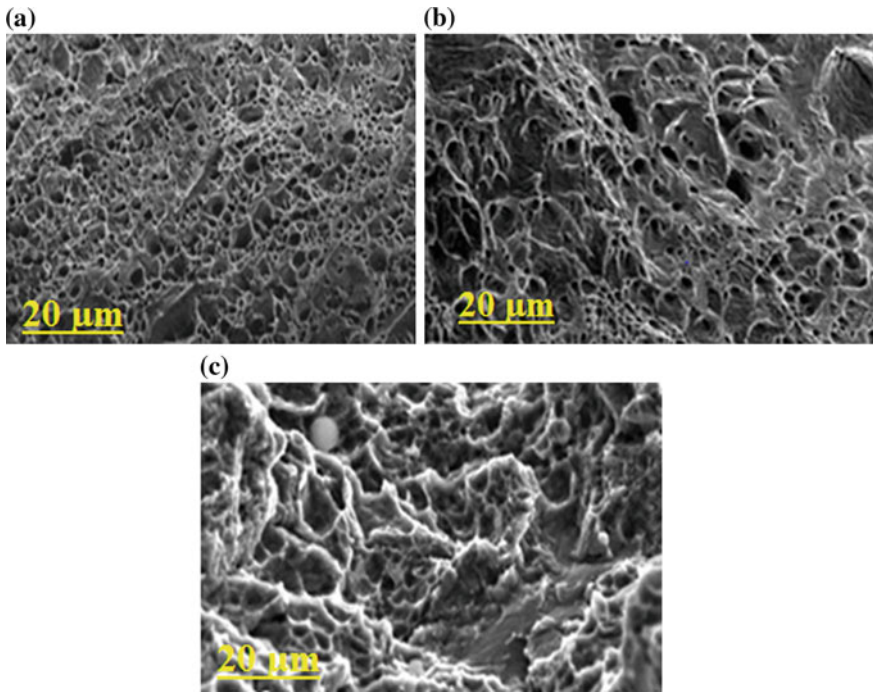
SEM images for different welding parameters a under-weld, b good weld, and c over-weld
